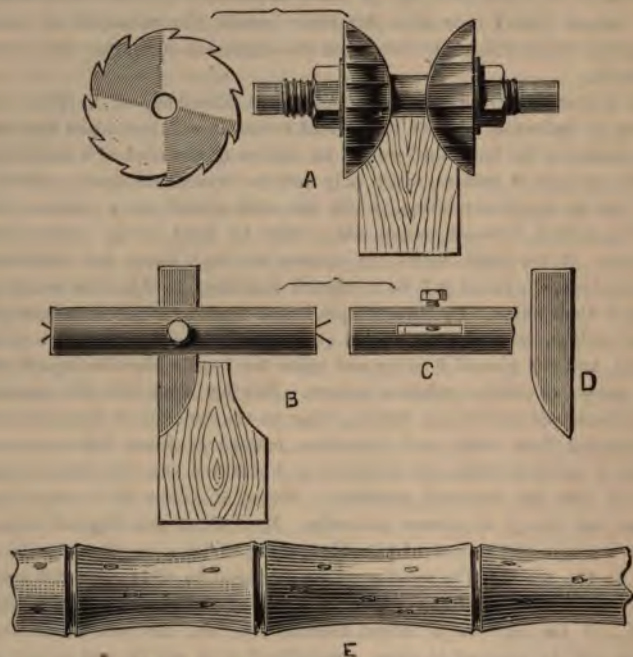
FORMING BEVELS WITH ROTATING CUTTERS.
